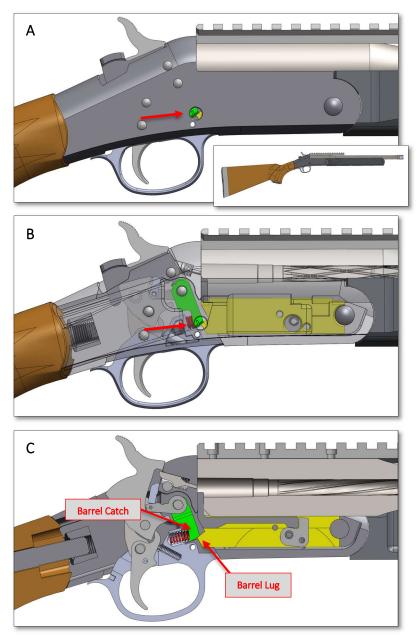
Action Lockup Assembly and Engagement Viewing Window
